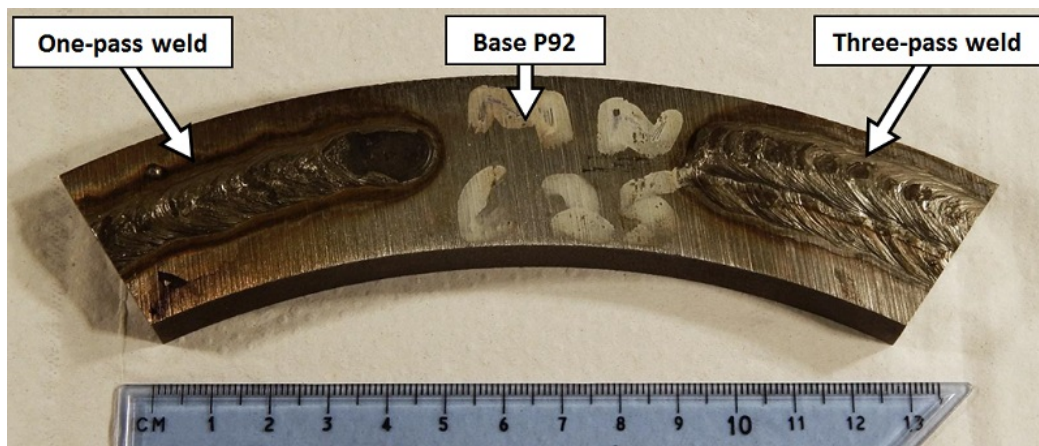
An overview of the P92 steel – Alloy 625 bead on plate weld, showing the single-pass and three-pass areas. Samples examined in this thesis were taken from the three-pass area.
